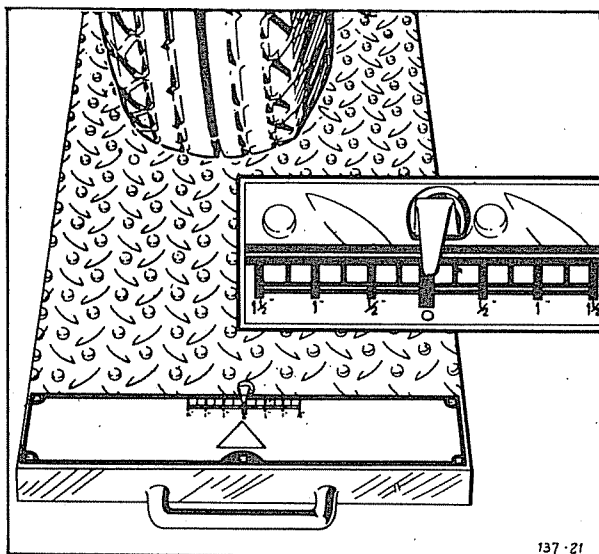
Front Wheel Toe-In—Wee-Gee Board—Tool DD-398.
